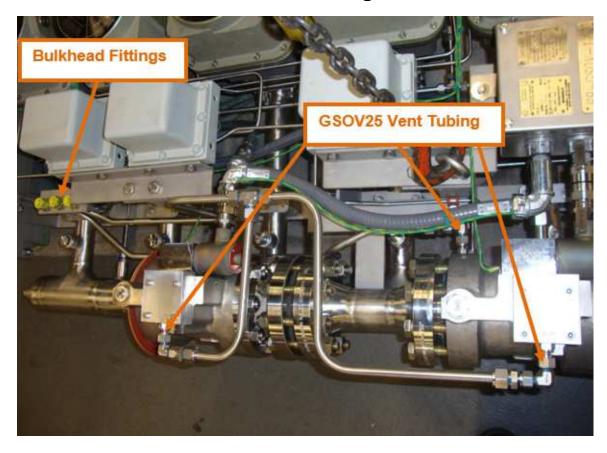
GSOV25-1/2 Vent Tube Removal
